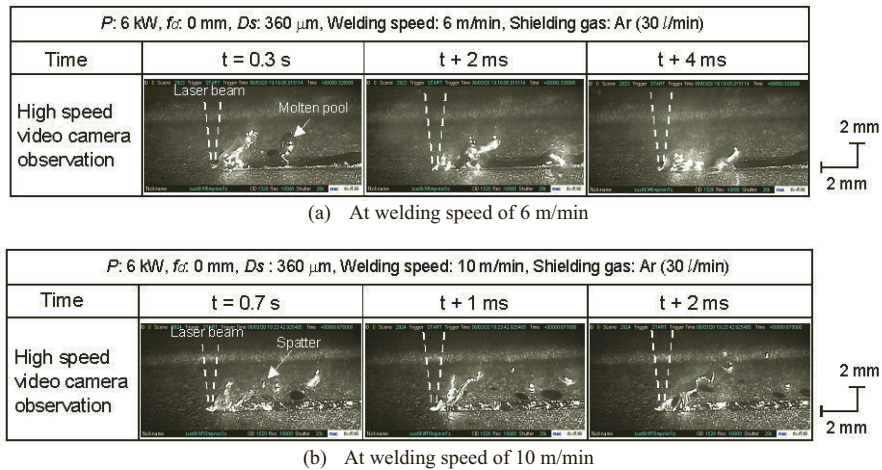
High-speed video camera observation results of molten pool surface during fiber laser welding at 6 kW power and 360 μm beam diameter
